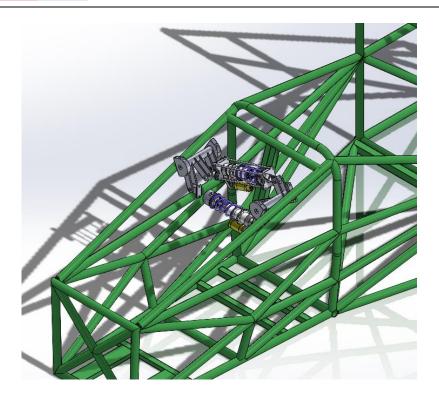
Image of the CAD model of the isometric view of the design mounted into the chassis
